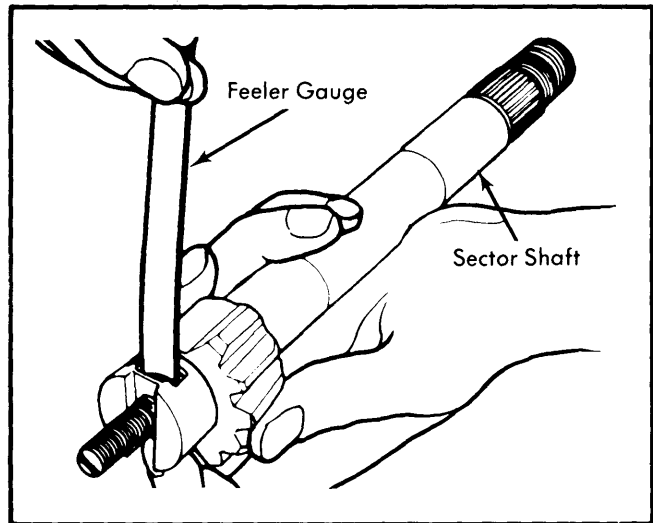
Measuring Sector Shaft-to-Adjusting Screw End Play
